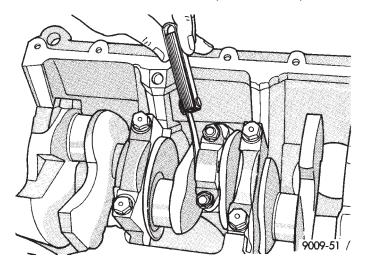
Checking Connecting Rod Side Clearance— Typical
